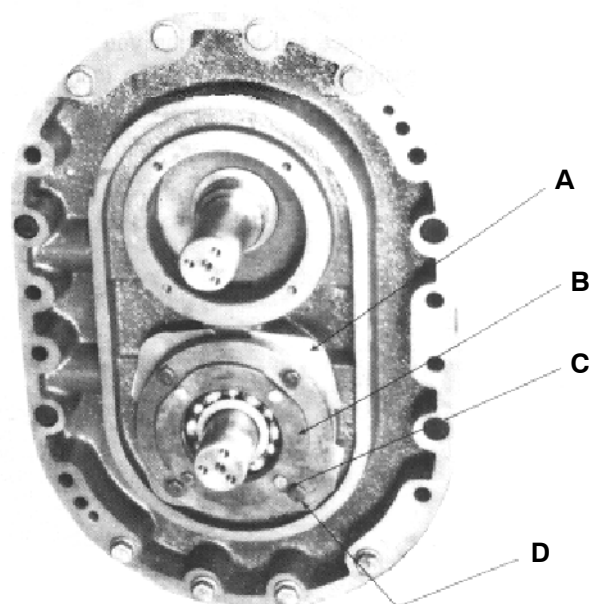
BEARING CARTRIDGE REMOVAL
